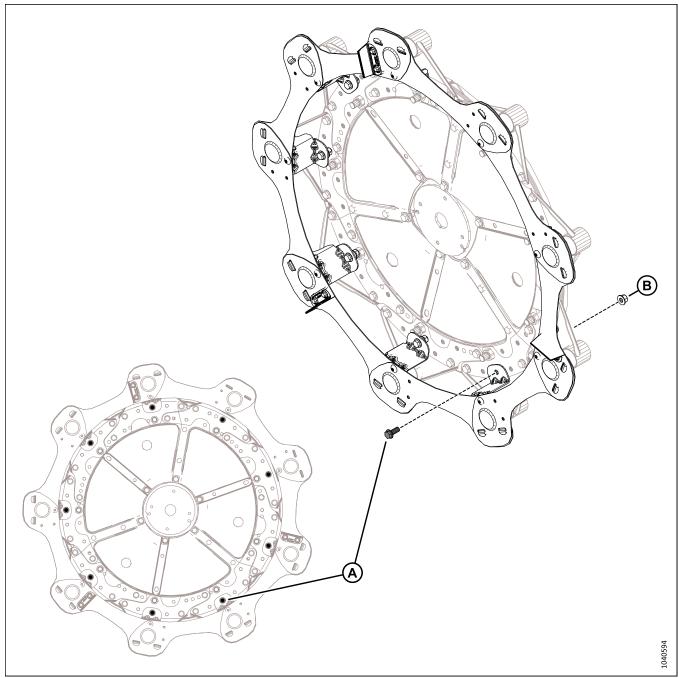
Nine-Bat Reel – Initial Endshield Assembly
